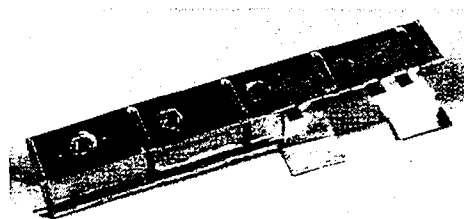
Potential mounting technique with which preformed nickel sheet can be soldered to the mounting surface.
